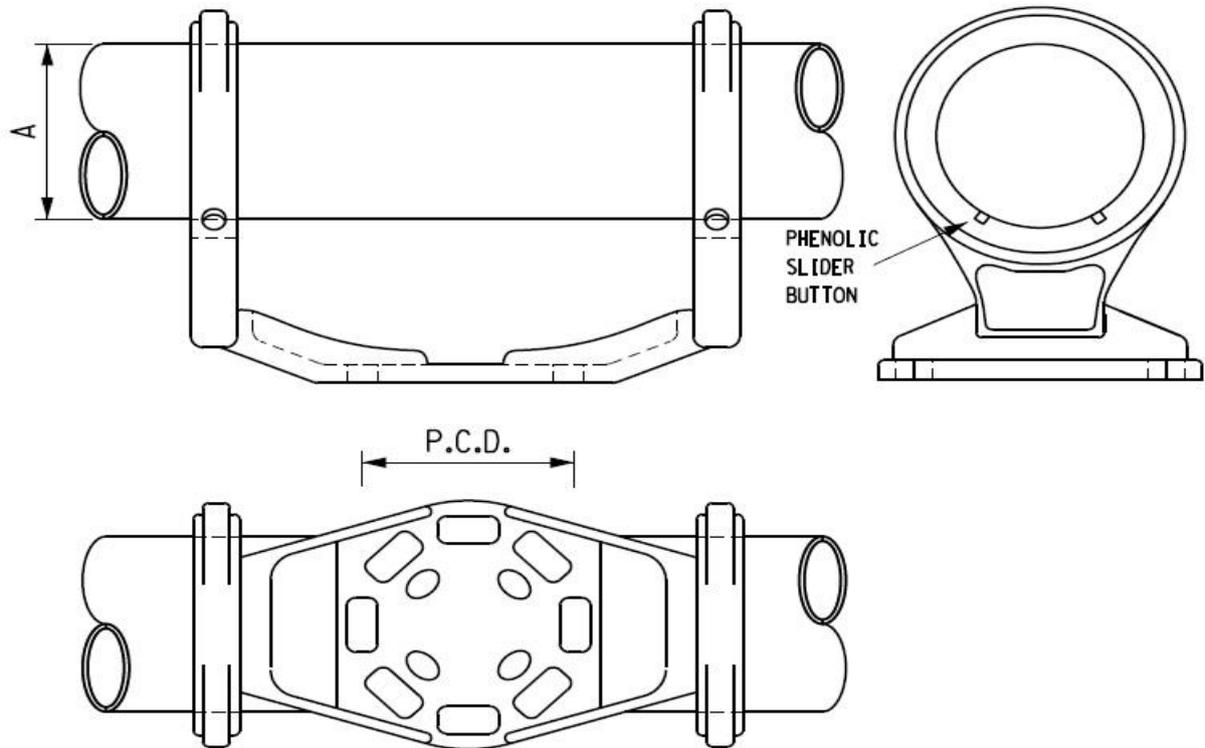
ESC-PI-TS-1: Support Clamp – Post Insulator Mounted – Tube Slide (D-DT-6118)
